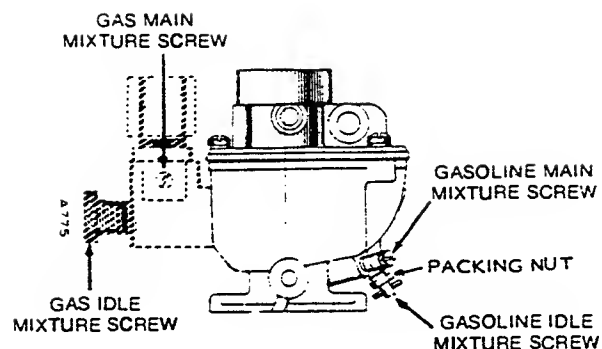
GASEOUS CARBURETOR ADJUSTMENTS
